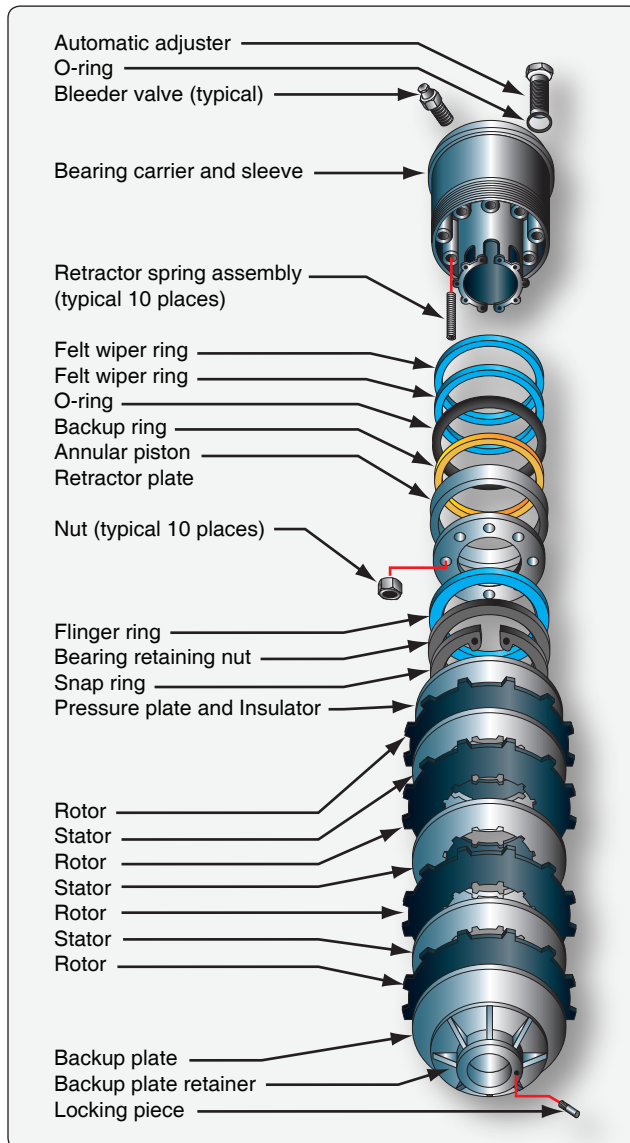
A multiple disc brake with bearing carrier upon which the parts of the brake are assembled including an annular cylinder and piston assembly that apply pressure evenly to a stack of rotors and stators.
